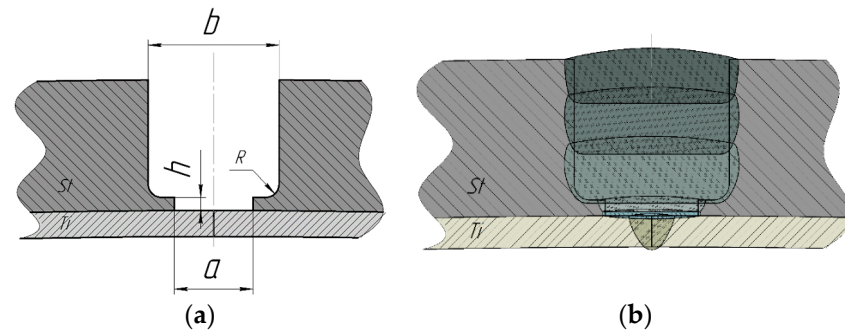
(a) Groove shape and parameters in a sample of welded butt joint of steel–titanium bimetal plates; (b) scheme for the longitudinal weld formation.
